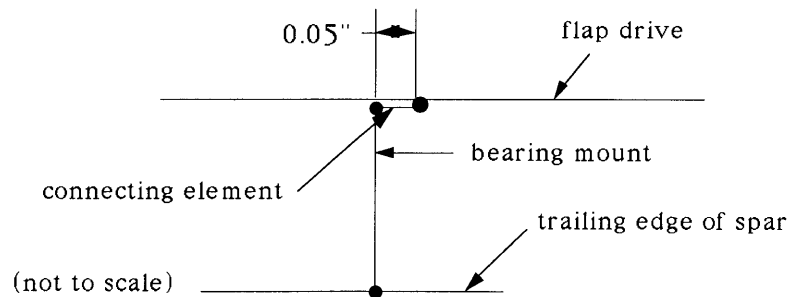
Schematic of an extra connecting element from the drive shaft to a bearing mount
